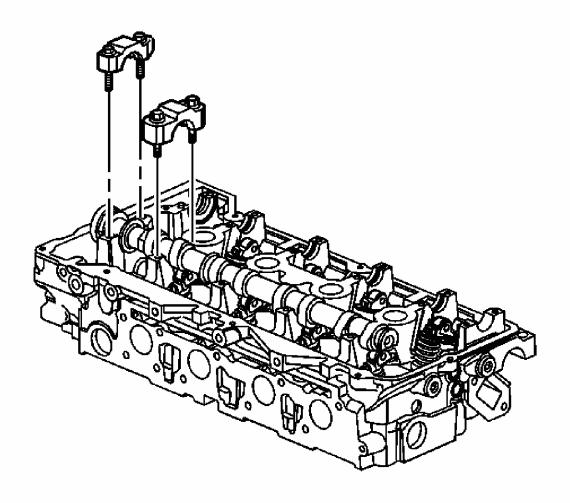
View Of Left Exhaust Bearing Caps & Bolts Courtesy of GENERAL MOTORS CORP.
